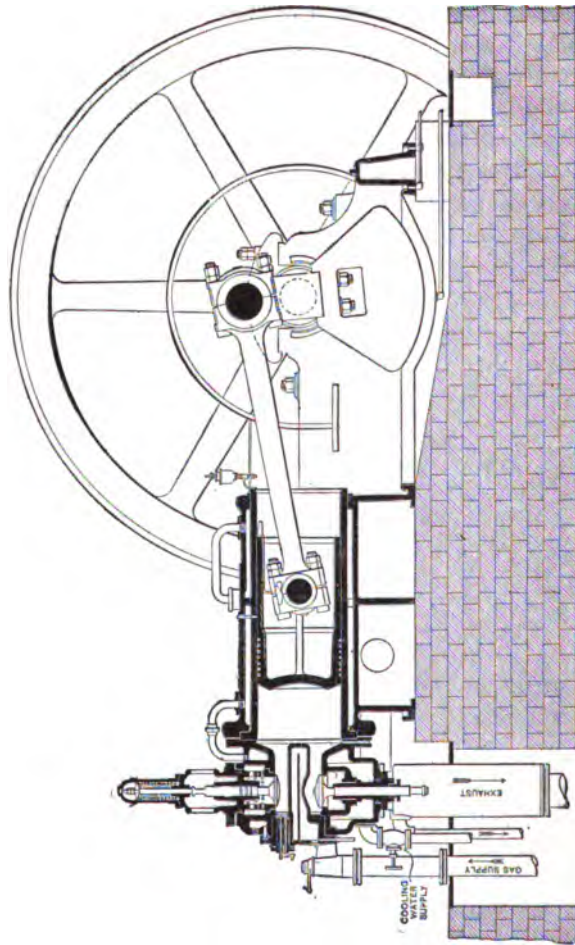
Longitudinal section of Koerting four-cycle gas engine, showing cylinder construction and valves
